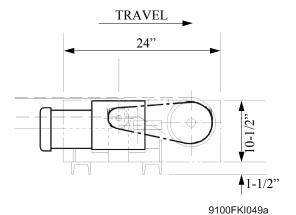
800 Series End Drive (Side Mounted Power Unit)
